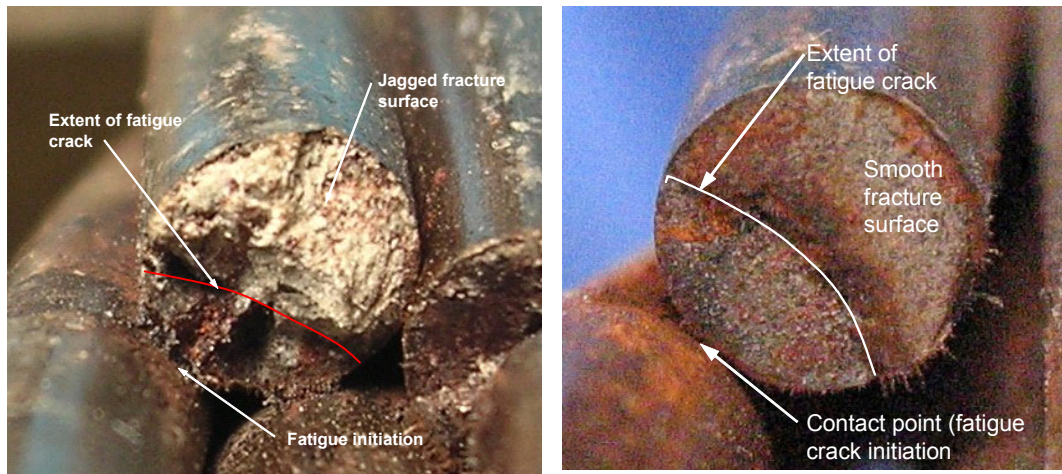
Observed fretting fatigue mechanisms - Specimen 7
